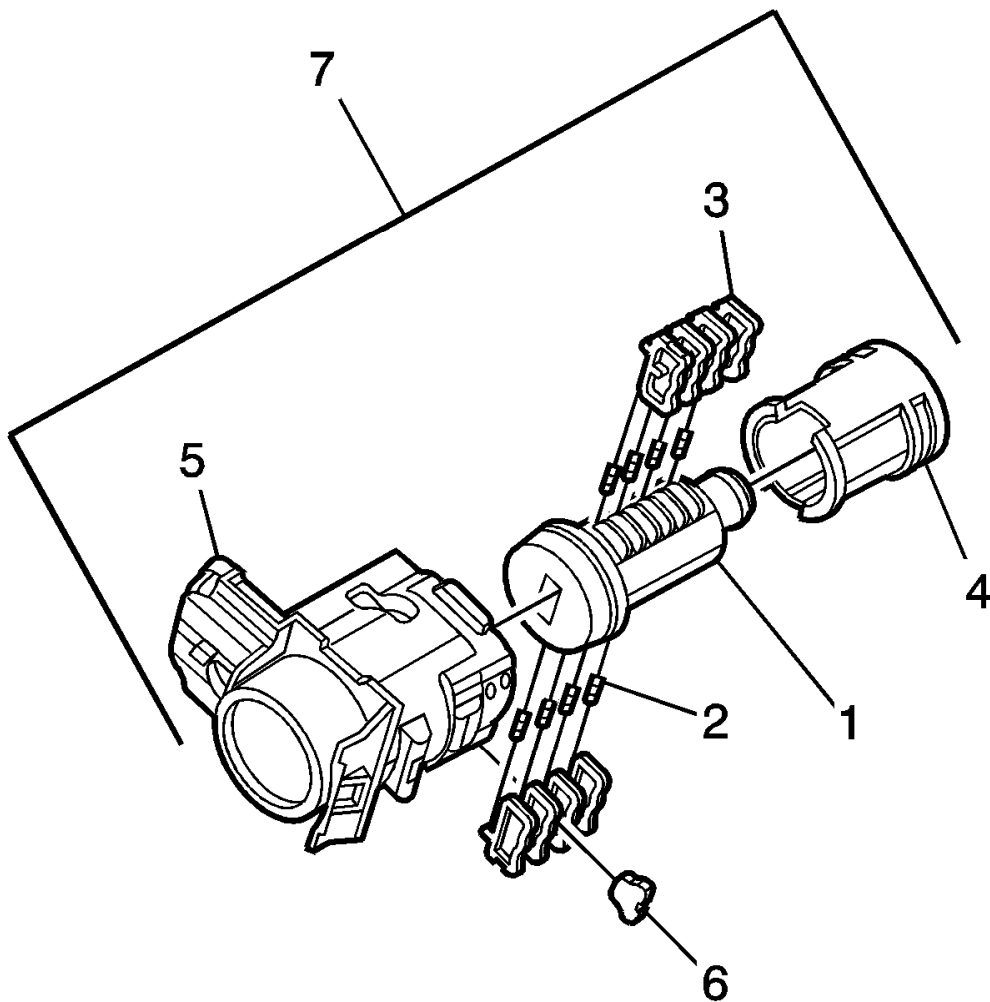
Door Lock Cylinder Components (Non-Free Wheeling)
